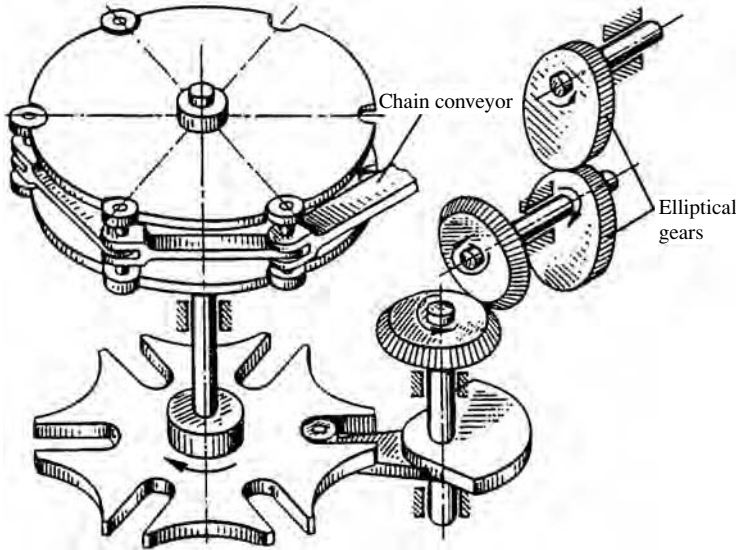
Conveyor driven by the Geneva mechanism and elliptical gears.
